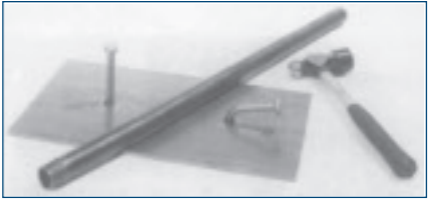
Bend test for welded studs to determine acceptable welding procedures.
